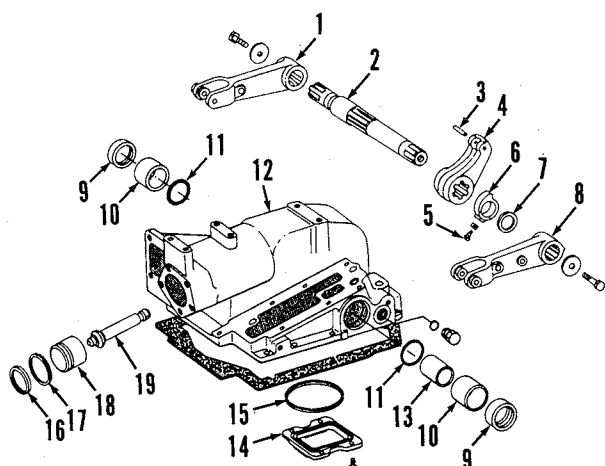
Exploded view of typical rockshaft housing showing component parts. Inner bushing (13) is not used on Models 4650 and 4850.
